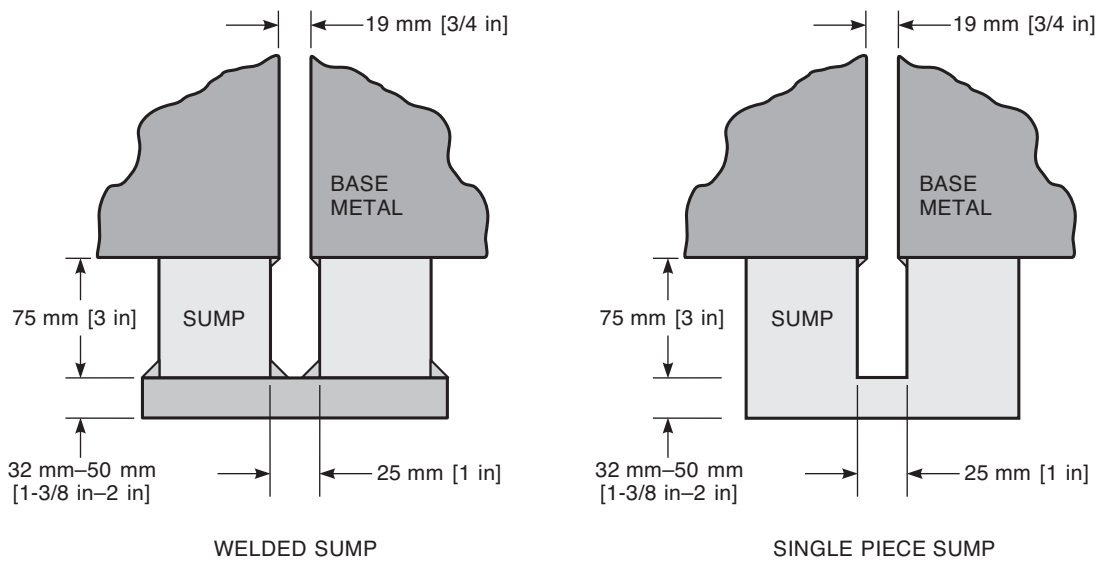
ESW Welded and Single Piece Sumps
